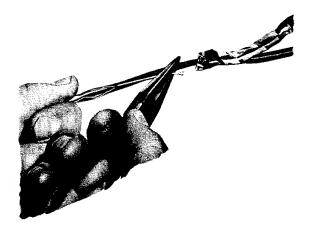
Slitting Inner Jacket, Using Slitting Cord
